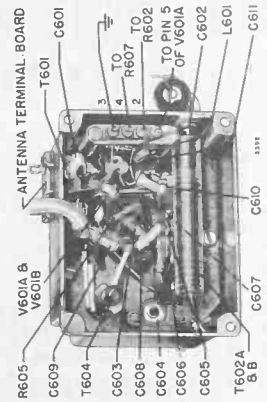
Bottom View of FM Tuner Sub-chassis. Location of components shown.
